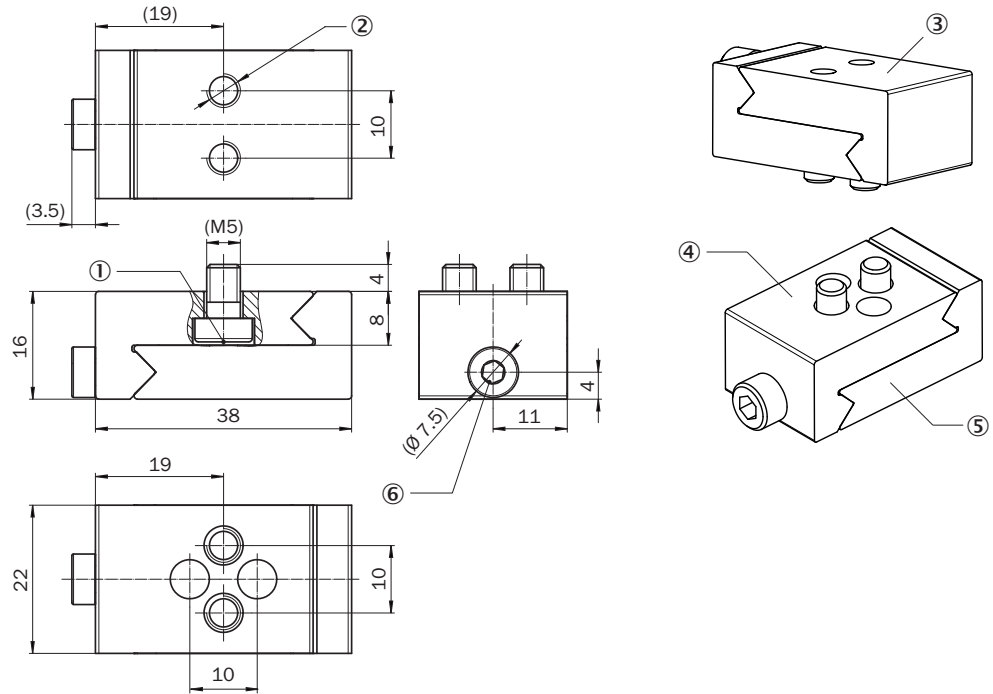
View of the quick release (dimensions in mm) and combination with mounting bracket
